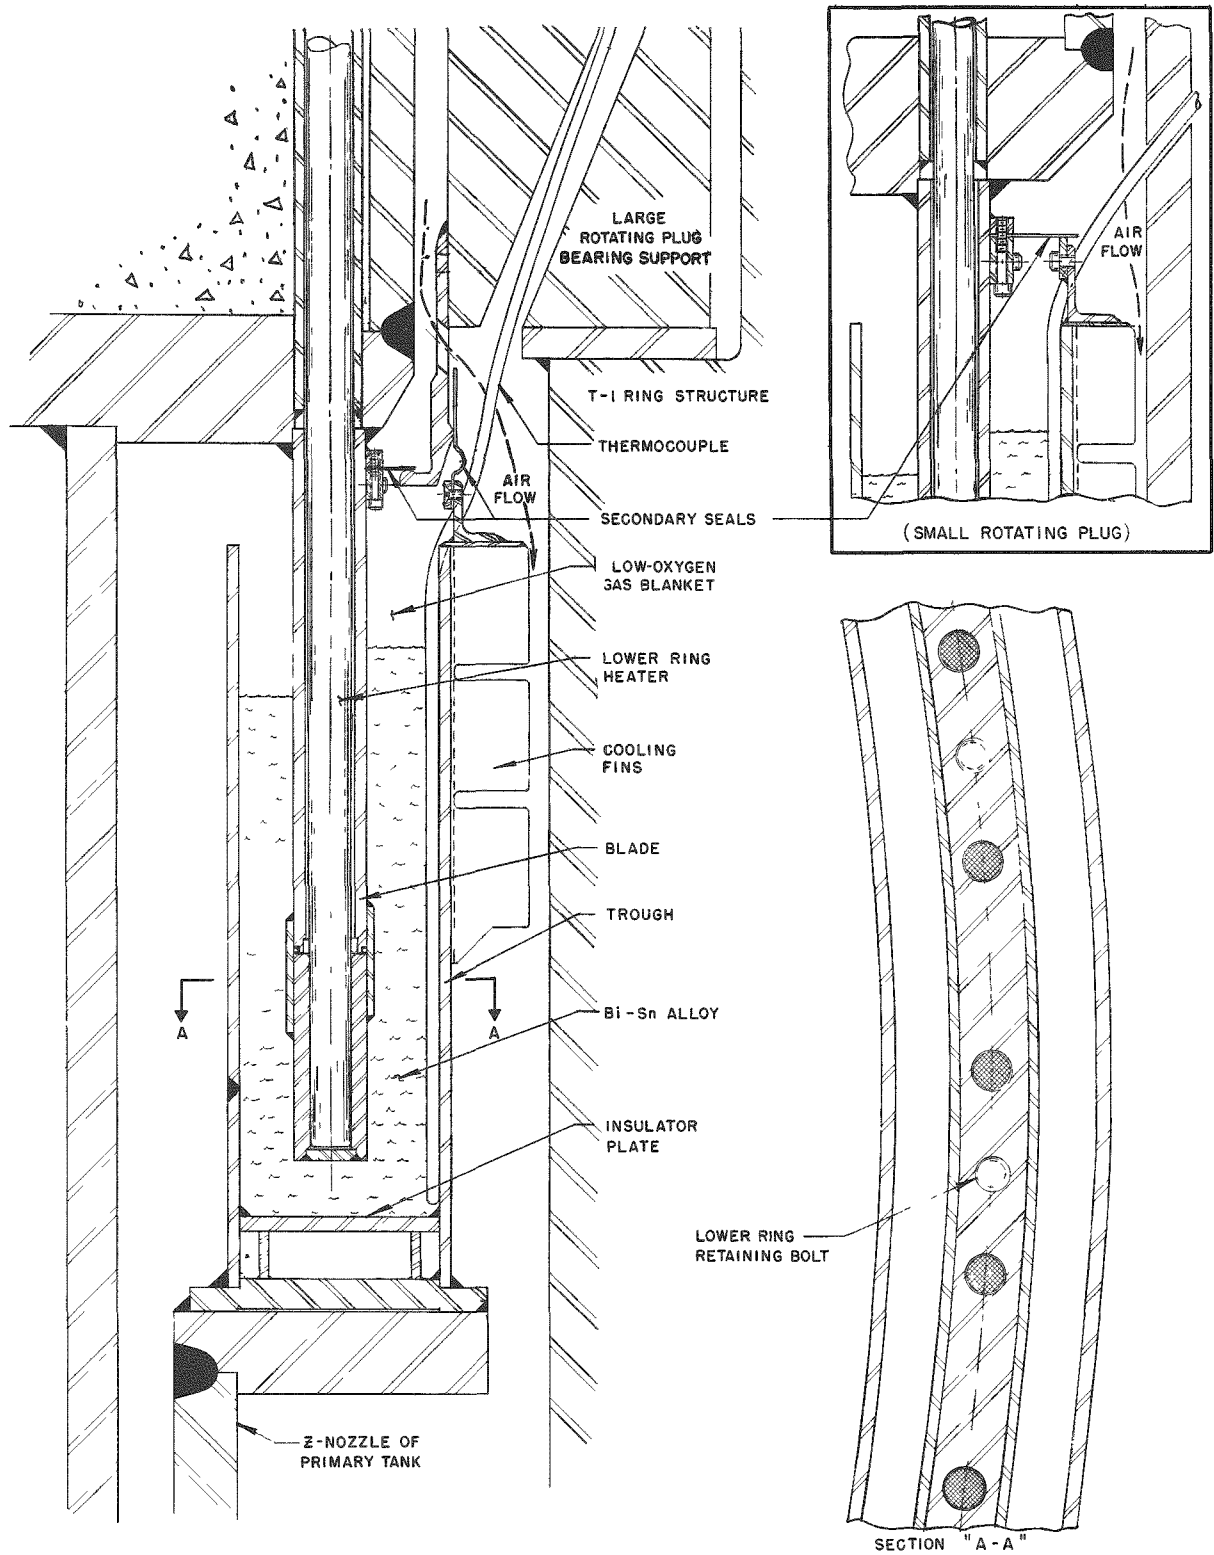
Large Rotating Plug Freeze Seal (Revised)
